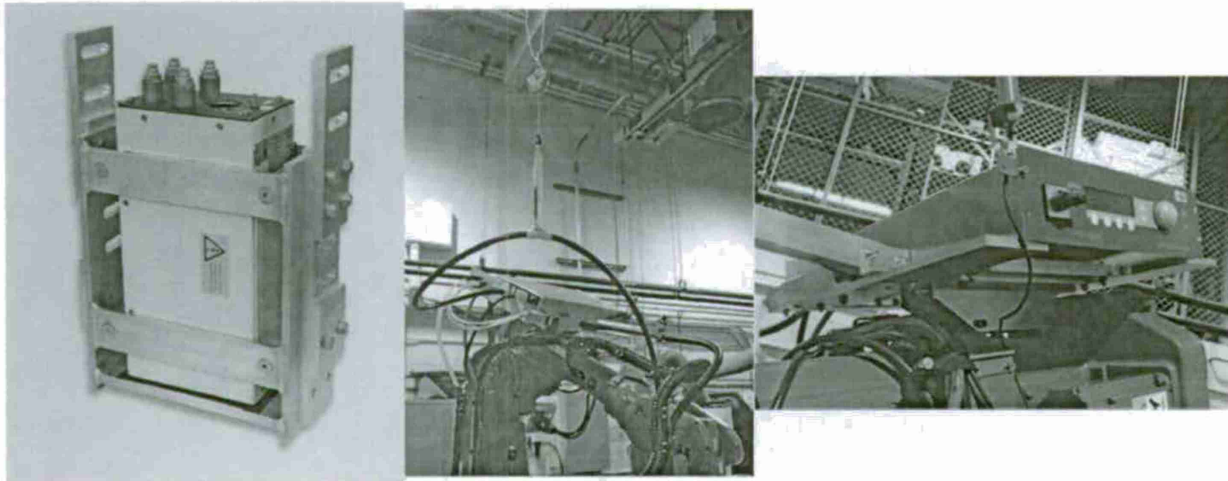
AMP Consolidation Module (with Huettinger TIG 5/300 5kW welding system)
